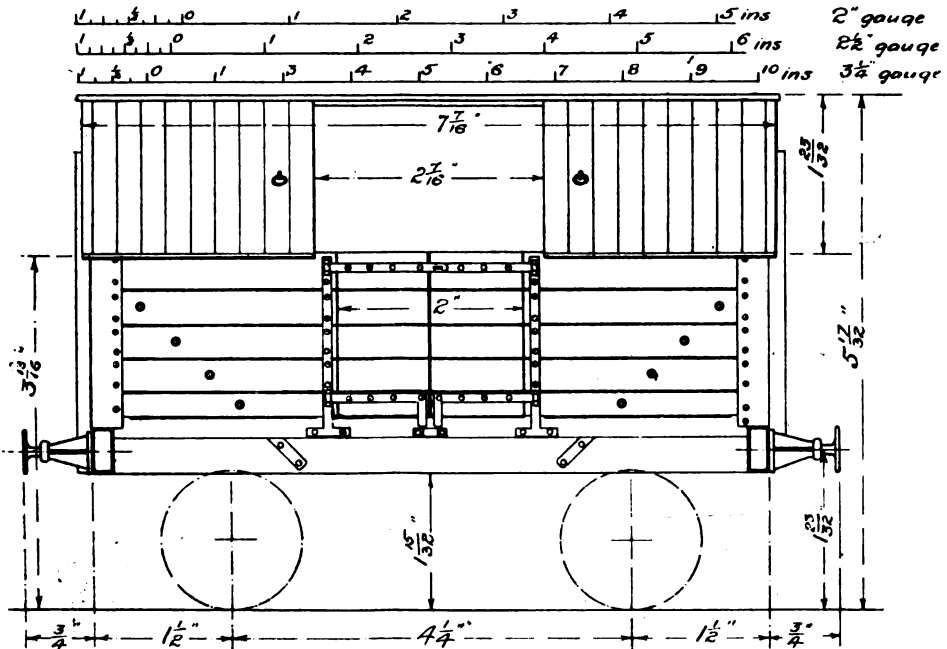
ELEVATION OF LIME AND CEMENT WAGON. (Dimensioned for 1/2 in. scale model.)
